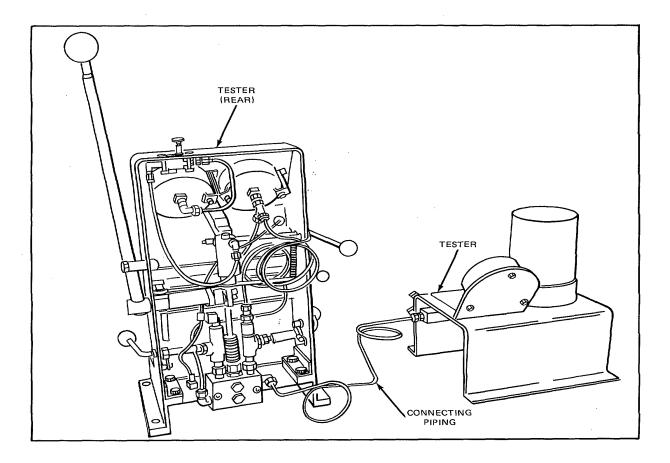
Injector Needle Valve Tester J 23010 with Auxiliary Tester J 22640
